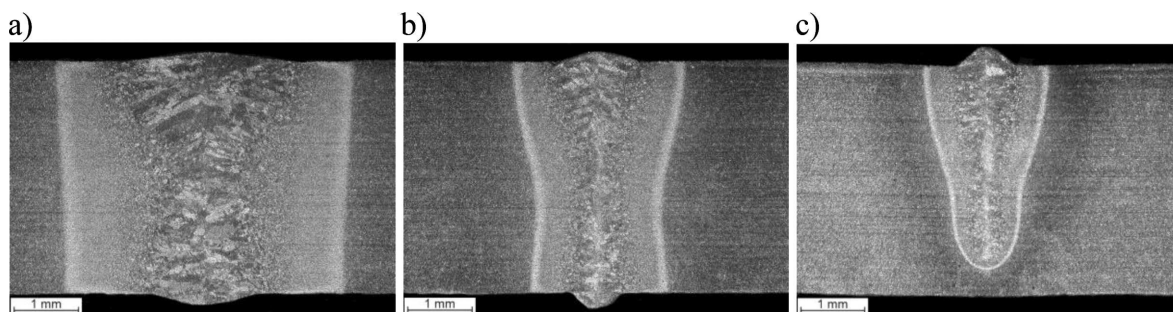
Macrographs of the cross-section of bead-on-plate welds produced at laser power of 2000 W and different welding speeds: a) 1.0 m/min; b) 2.0 m/min; c) 3.0 m/min (Table 2)
